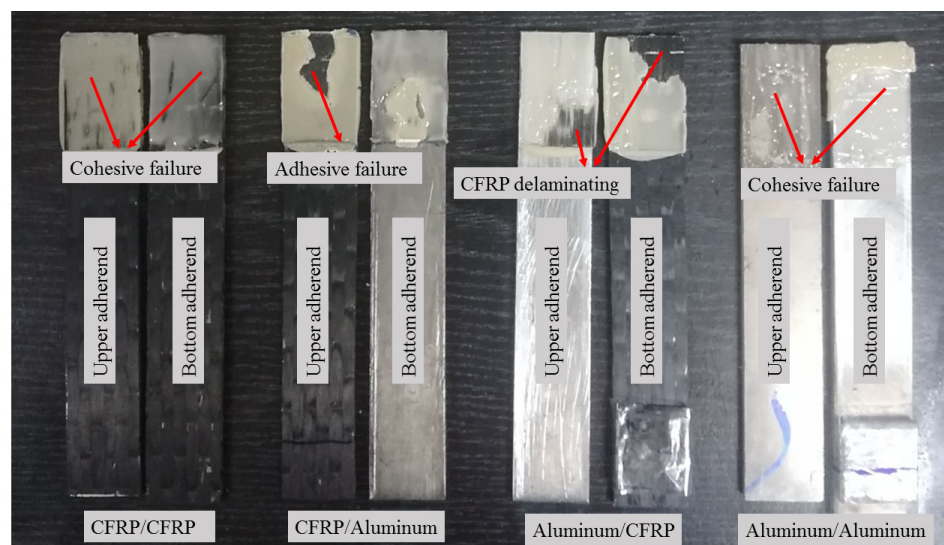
The fractured surface of the tested single-lap adhesive joints under three-point bending loading conditions.
